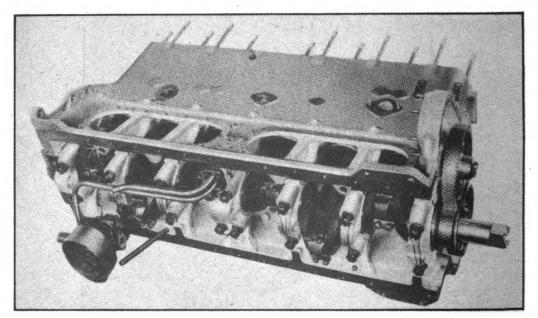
BOTTOM VIEW, OIL PAN REMOVED
